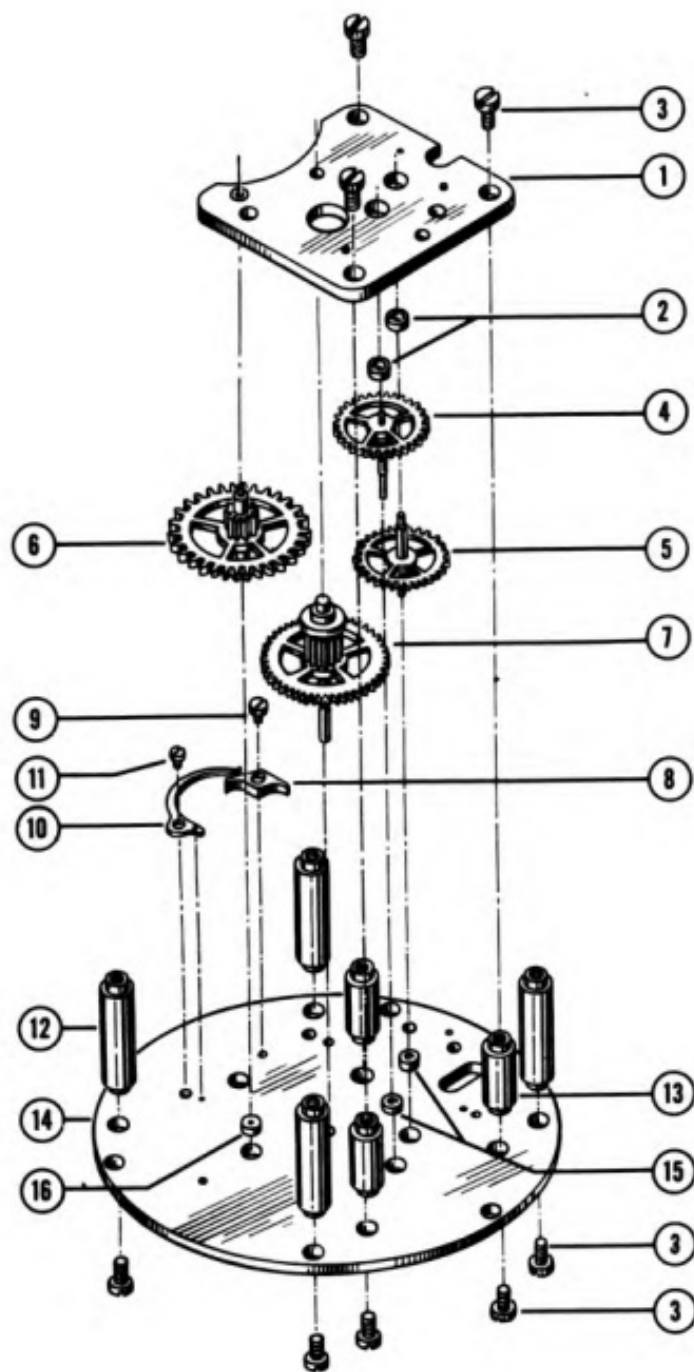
Chelsea No. 17E Boat and Deck Clock Components—Exploded View
